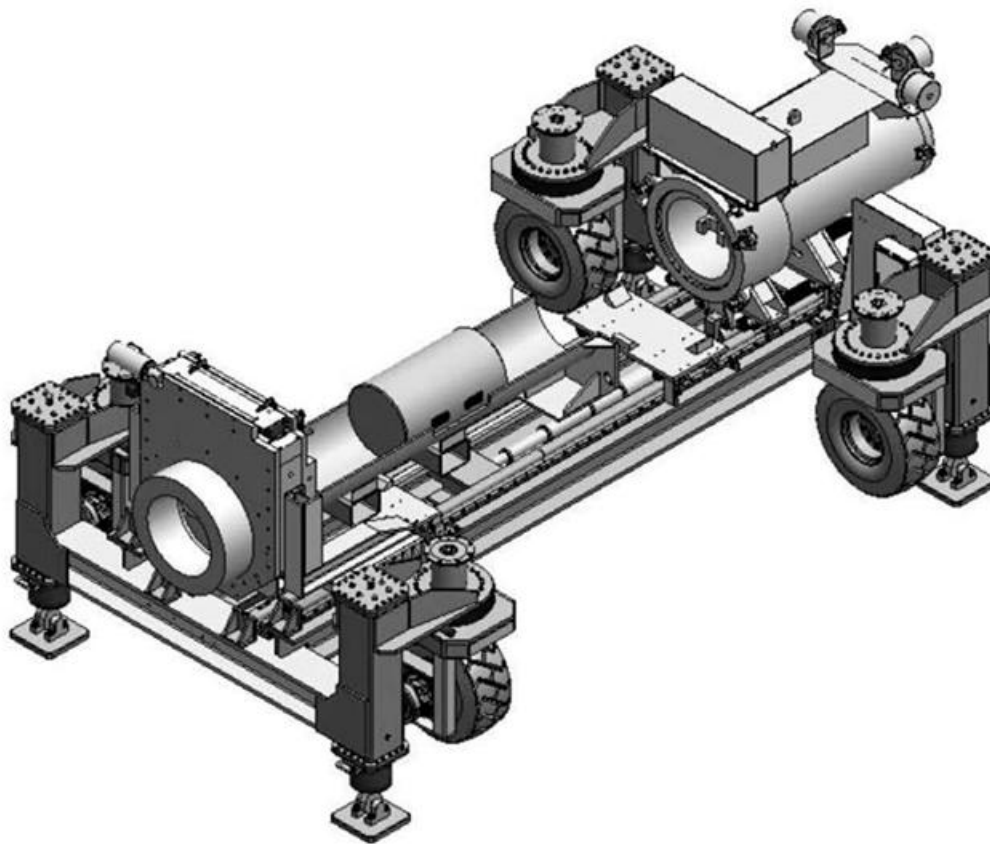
Horizontal Emplacement Machine with Shield Plug
